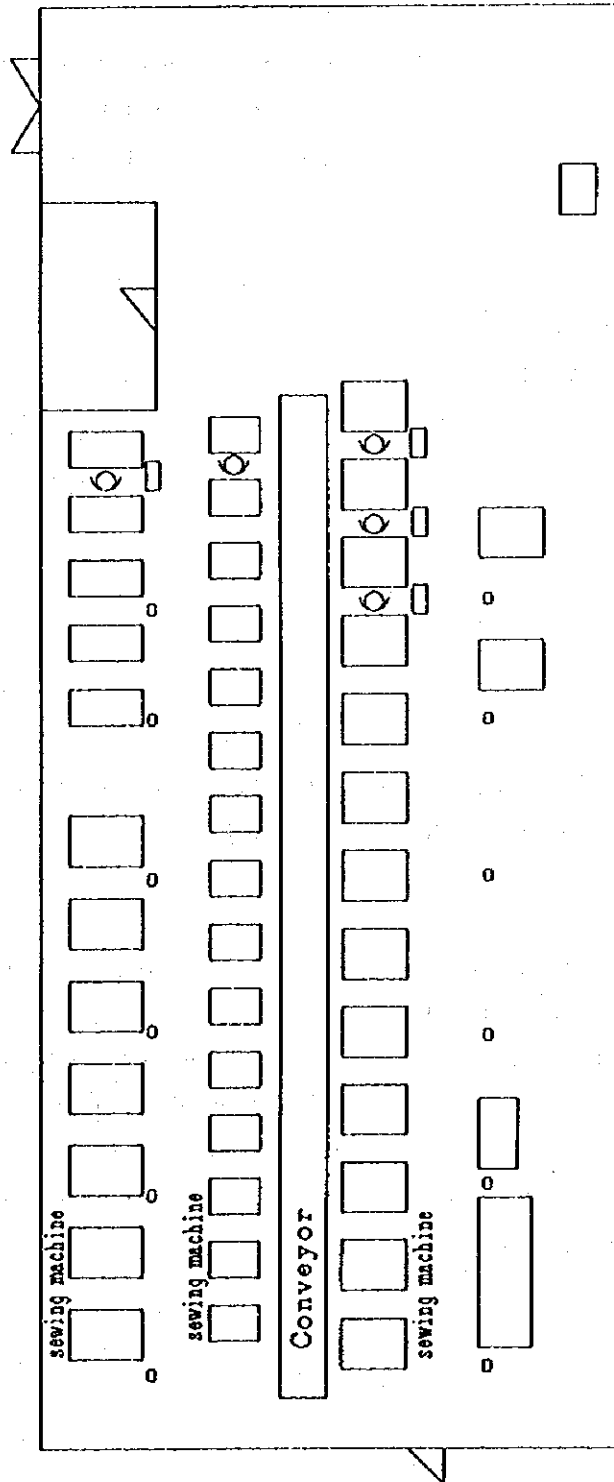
Equipment Layout of the Sewing Process (for bus seats)
